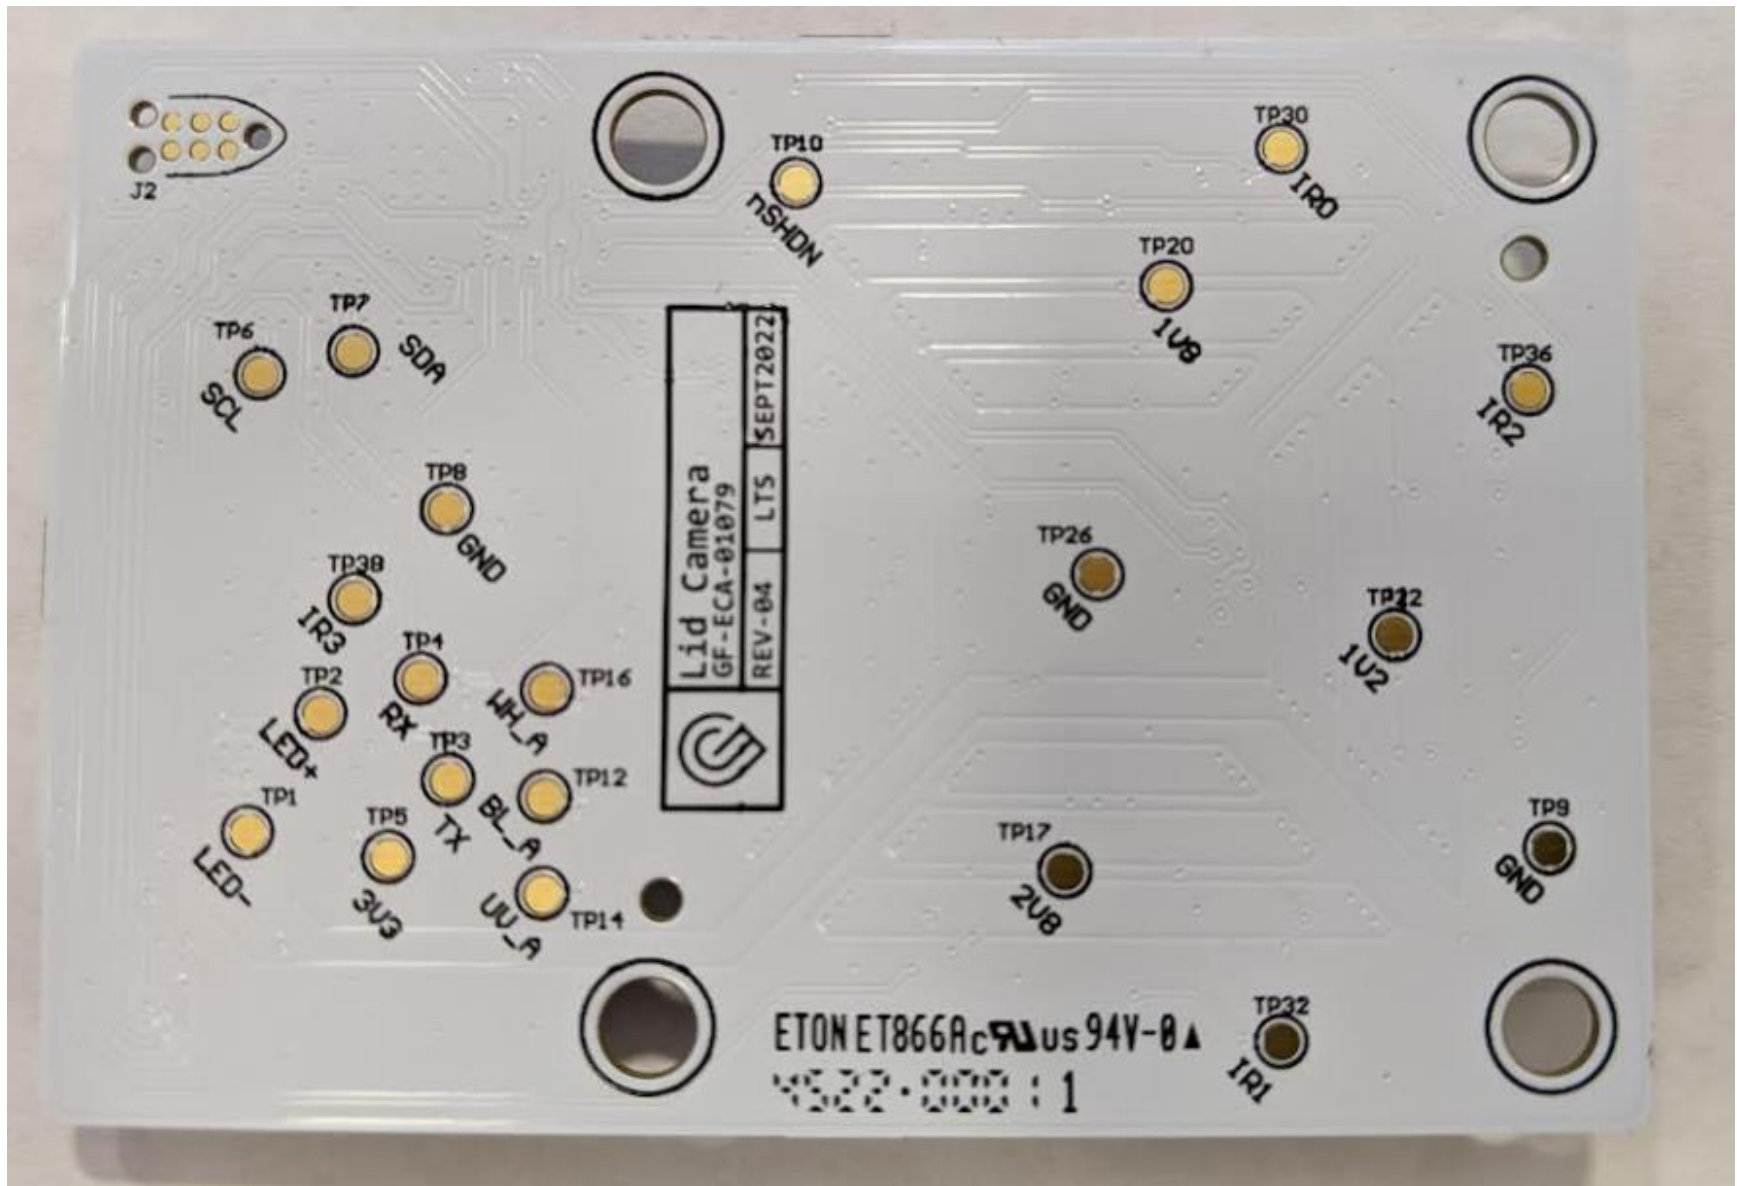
GF-PCA-00154- Lid PCBA-Bottom
